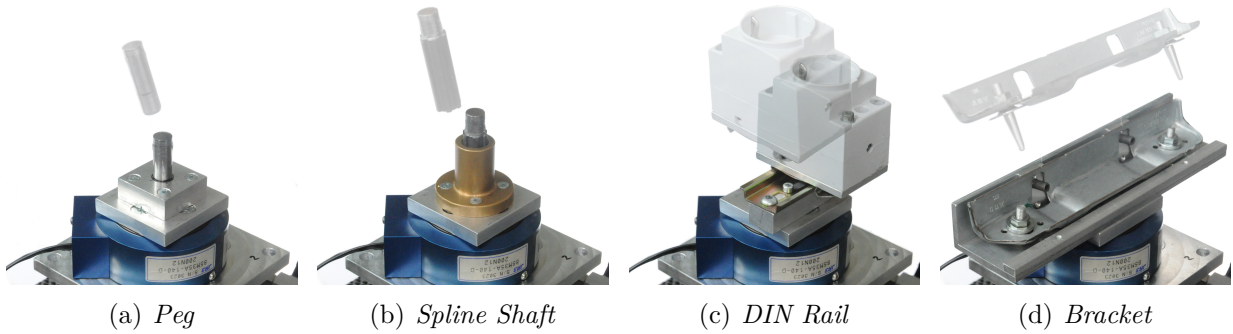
Exemplary images of all four assembly tasks. The transparent version shows the workpiece before assembly. The coloured version shows the result.
